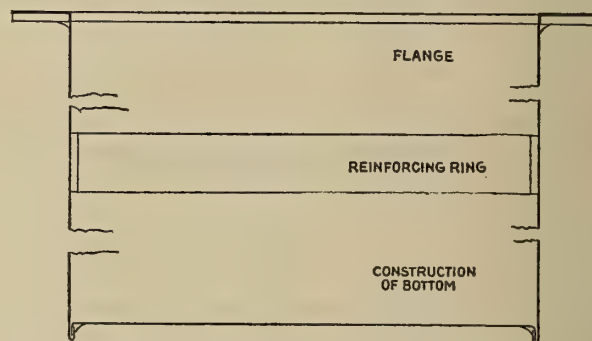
SECTION OF BODY SHOWING ASSEMBLY OF DISK AND CYLINDER
